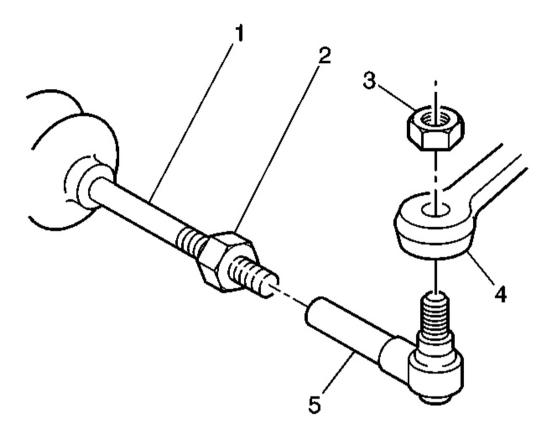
Outer Tie Rod End Stud, Inner Tie Rod, Steering Knuckle & Jam Nut Courtesy of GENERAL MOTORS CORP.
